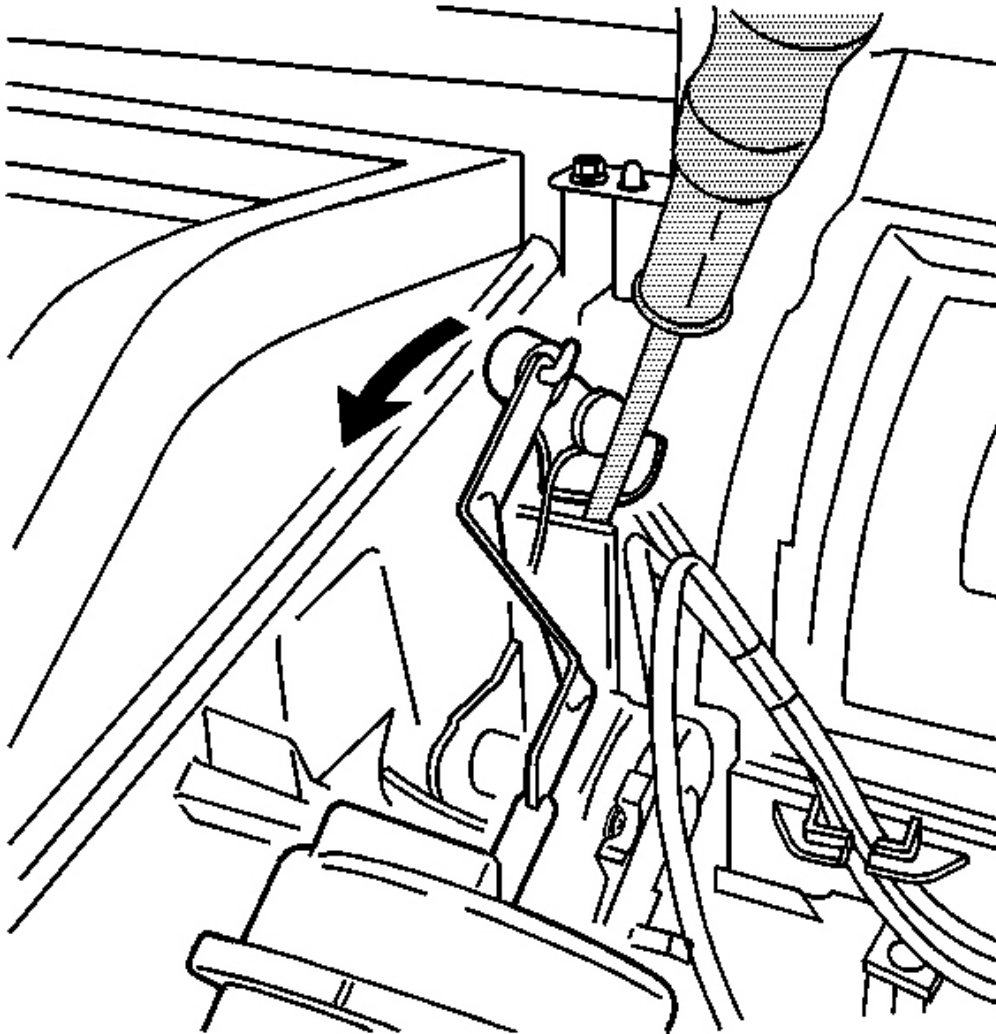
Defroster Actuator Vacuum Harness Connectors
